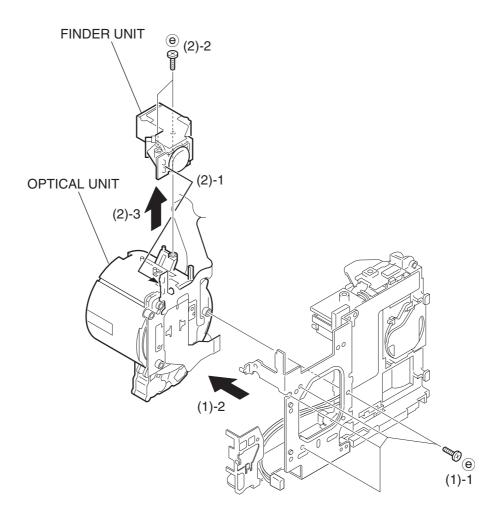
OPTICAL UNIT, FINDER UNIT
